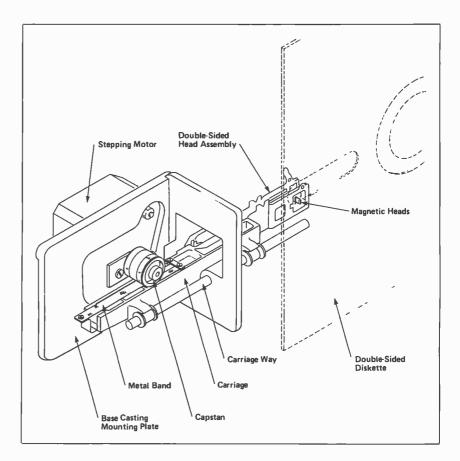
A diagram of the Shugart SA850 dual sided floppy disk drive. Note the metal band which is used for positioning the head assembly. (Graphics courtesy Shugart Associates.)
